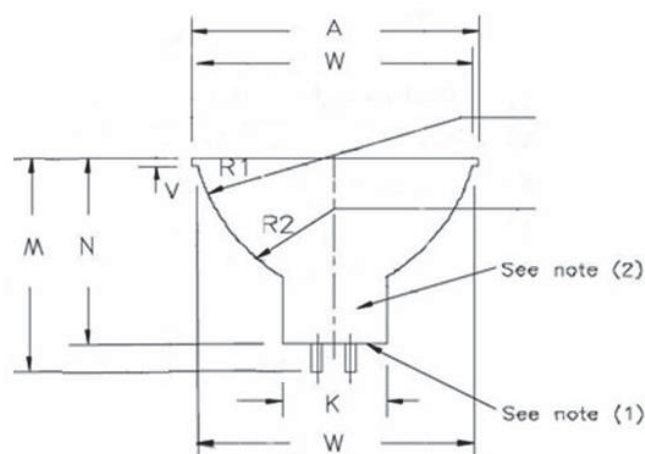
Standard dimensions of a 12V MR16 lamp (Miller & Curry, 2012, p. A3); amended by the author to include dimension M
